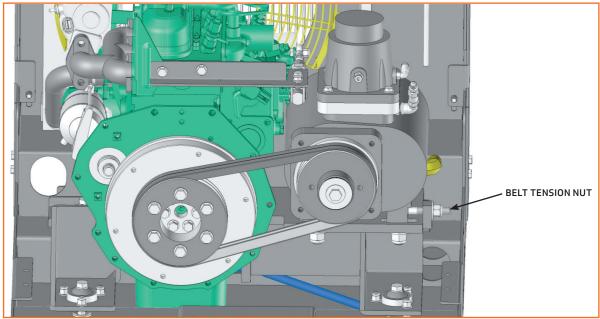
D110PKU COMPRESSOR DRIVE BELT
